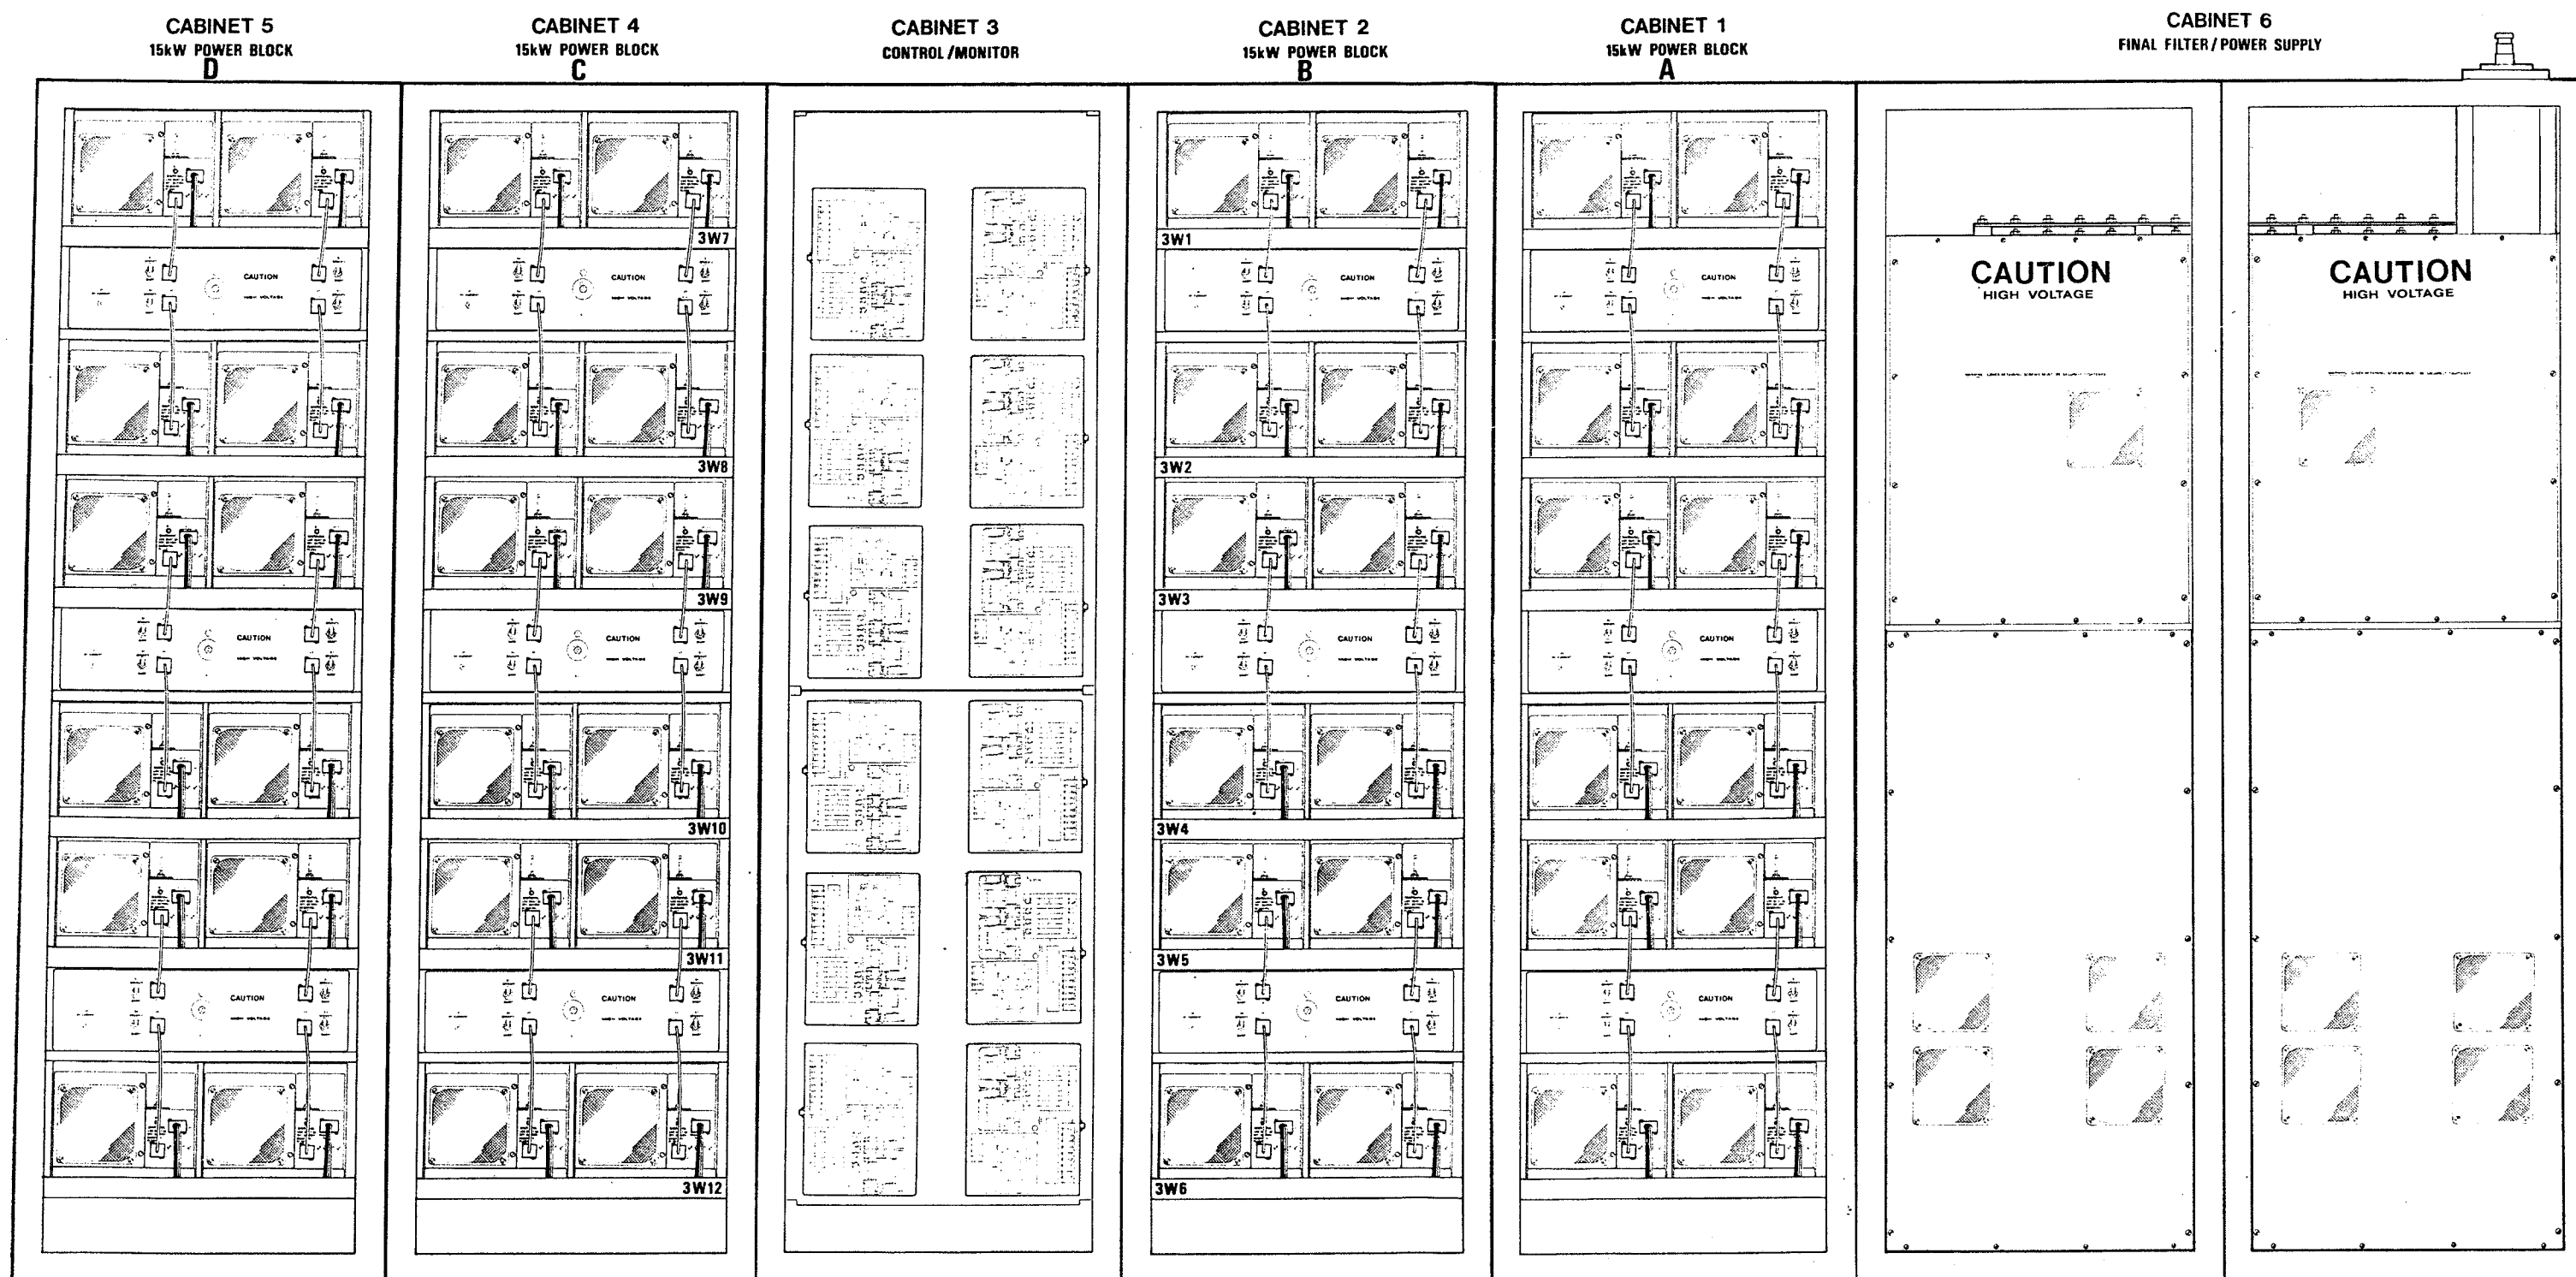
Assembly Detail - AMPFET 50 Transmitter (Rear View)
